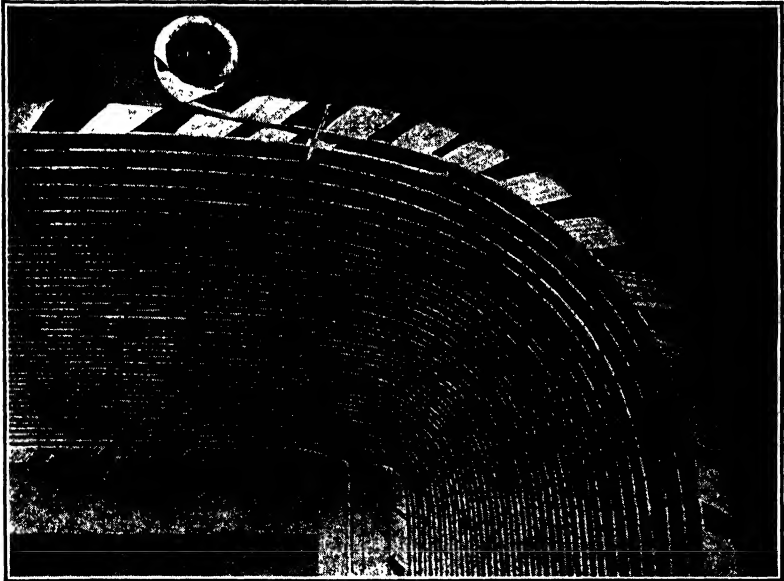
Detail of coil for shell-type transformer. (*Westinghouse Electric Corporation.*)
